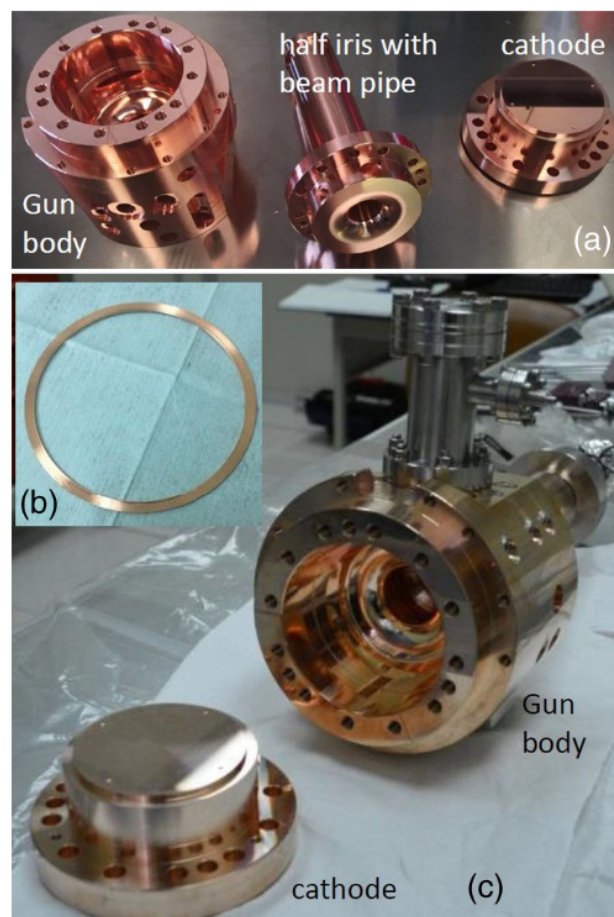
ELI-NP rf gun: a) Main gun components before clamping; (b) special gasket; (c) gun during assembly [33].
